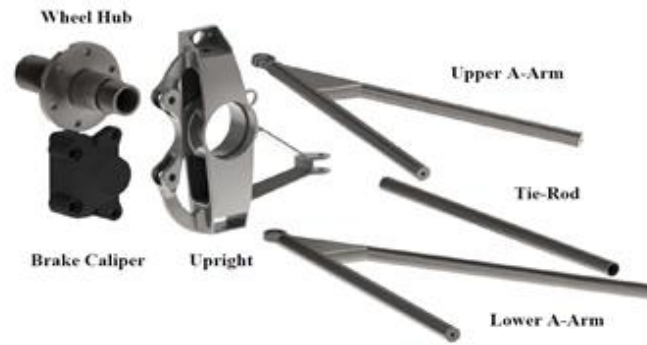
Upright (lightweight design) assembly with upper and lower a-arm, tie-rod and wheel hub [18]
